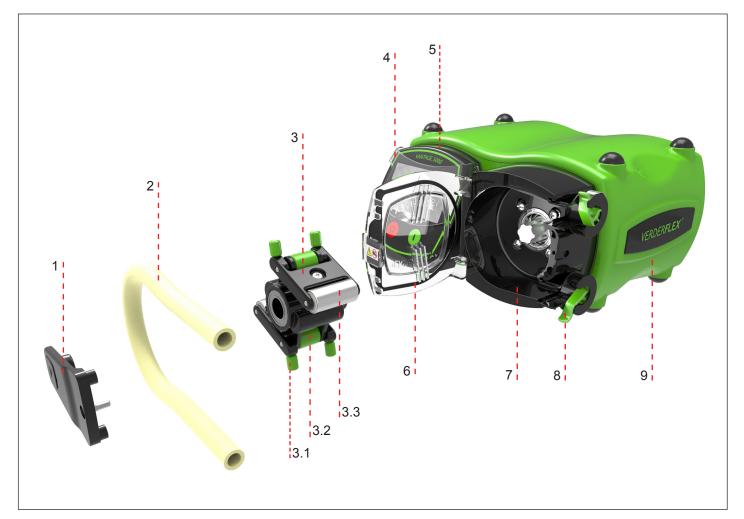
Vantage 5000 Exploded View - Continuous Tube
